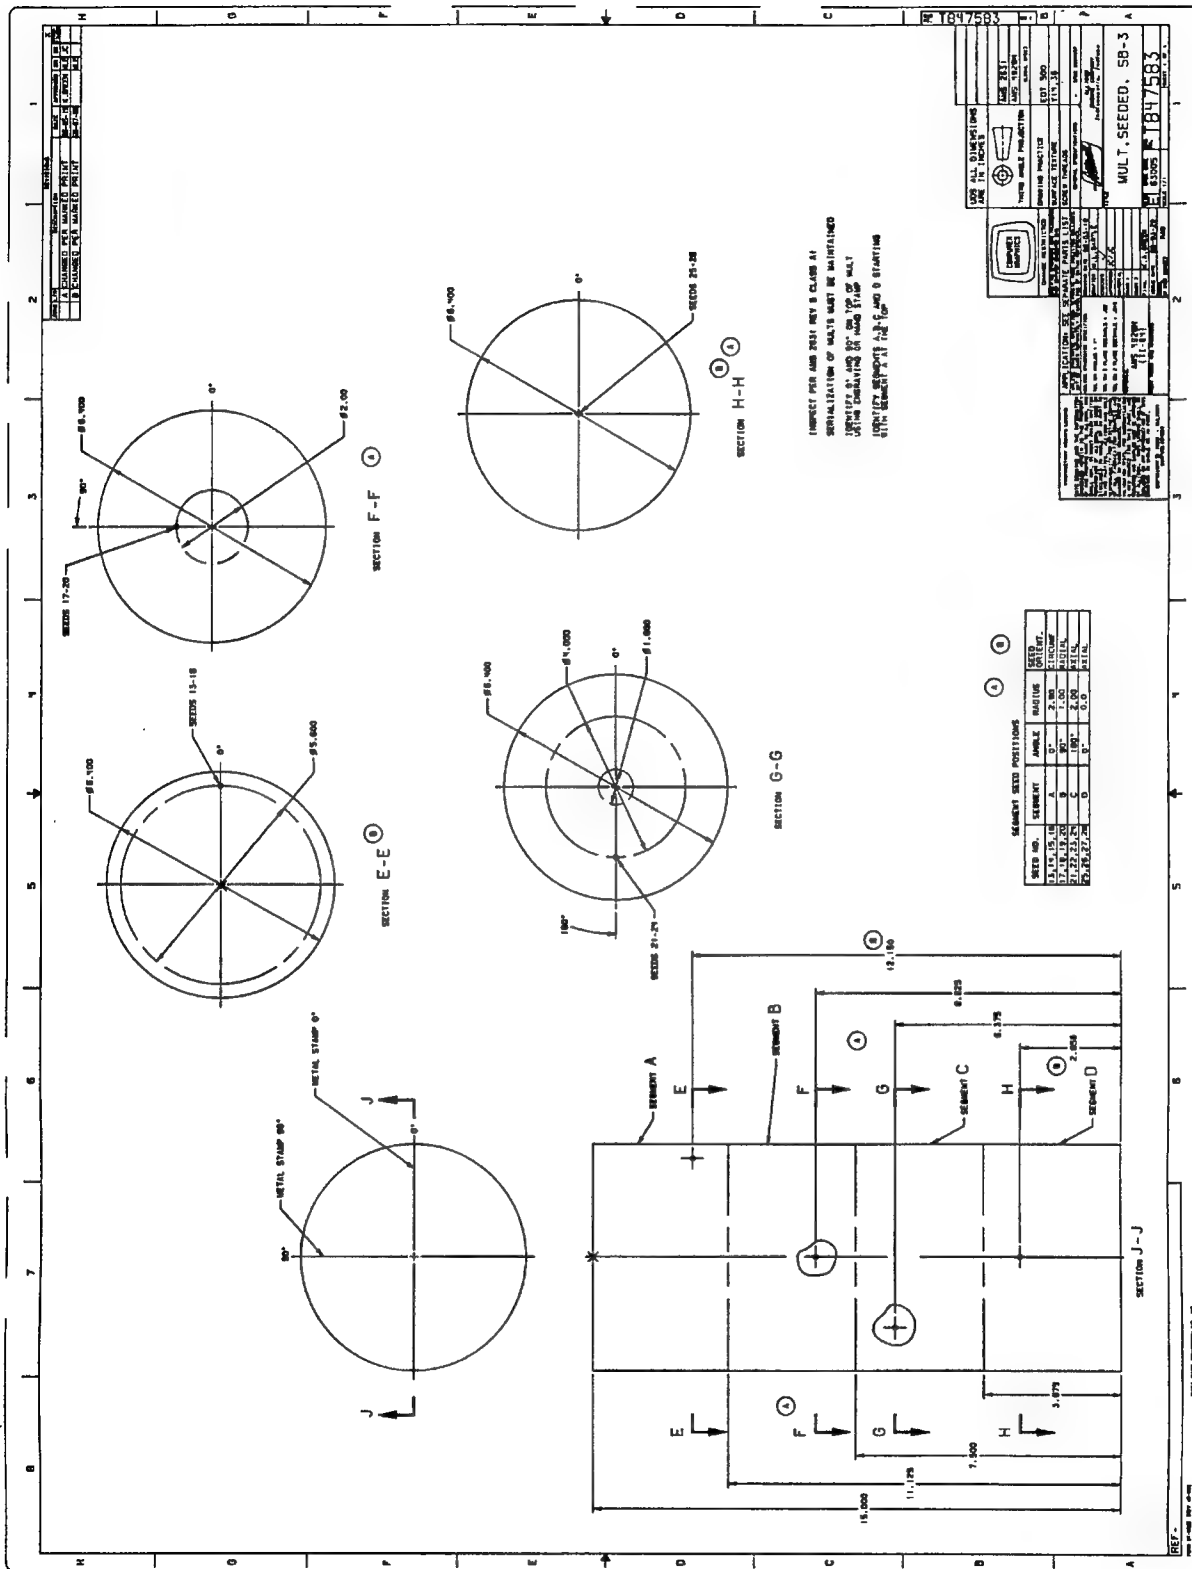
ENGINEERING DRAWING OF SEED PLACEMENT IN MULT SB-3
